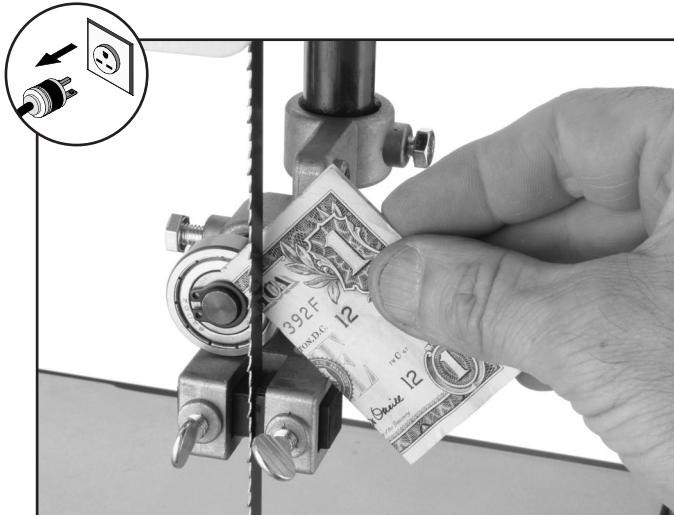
Blade should be perpendicular ( $90^\circ$ ) to the face of the support bearing.
